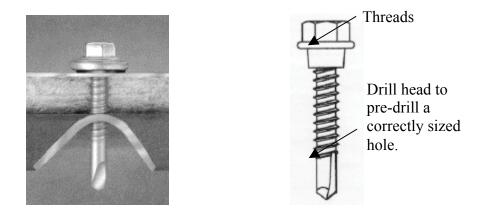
Typical Self-Drilling Sheet Metal Screws
